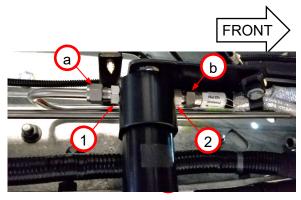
LP filter OUT port (1) compression fitting nut (a), LP filter OUT port (2) compression fitting nut (b).
